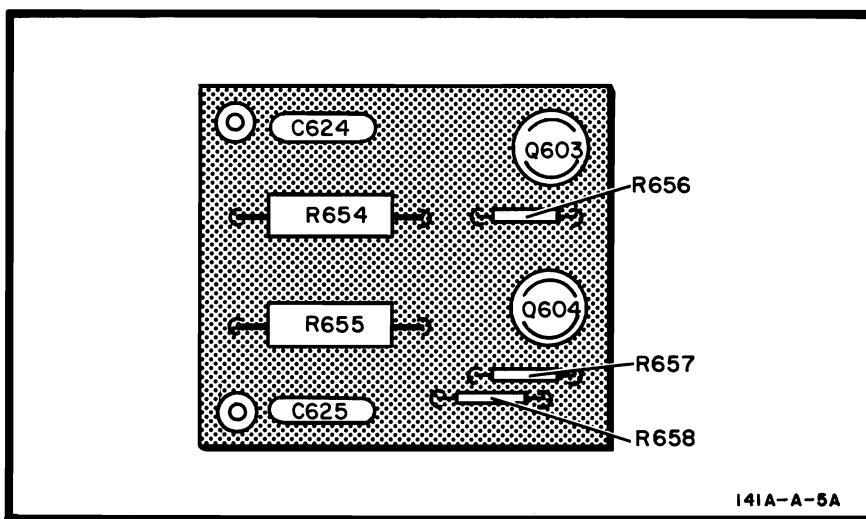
Component Identification, Horizontal Driver Board, A603
